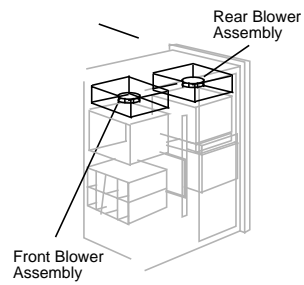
Rackmount Chassis Component - Blower Assemblies
